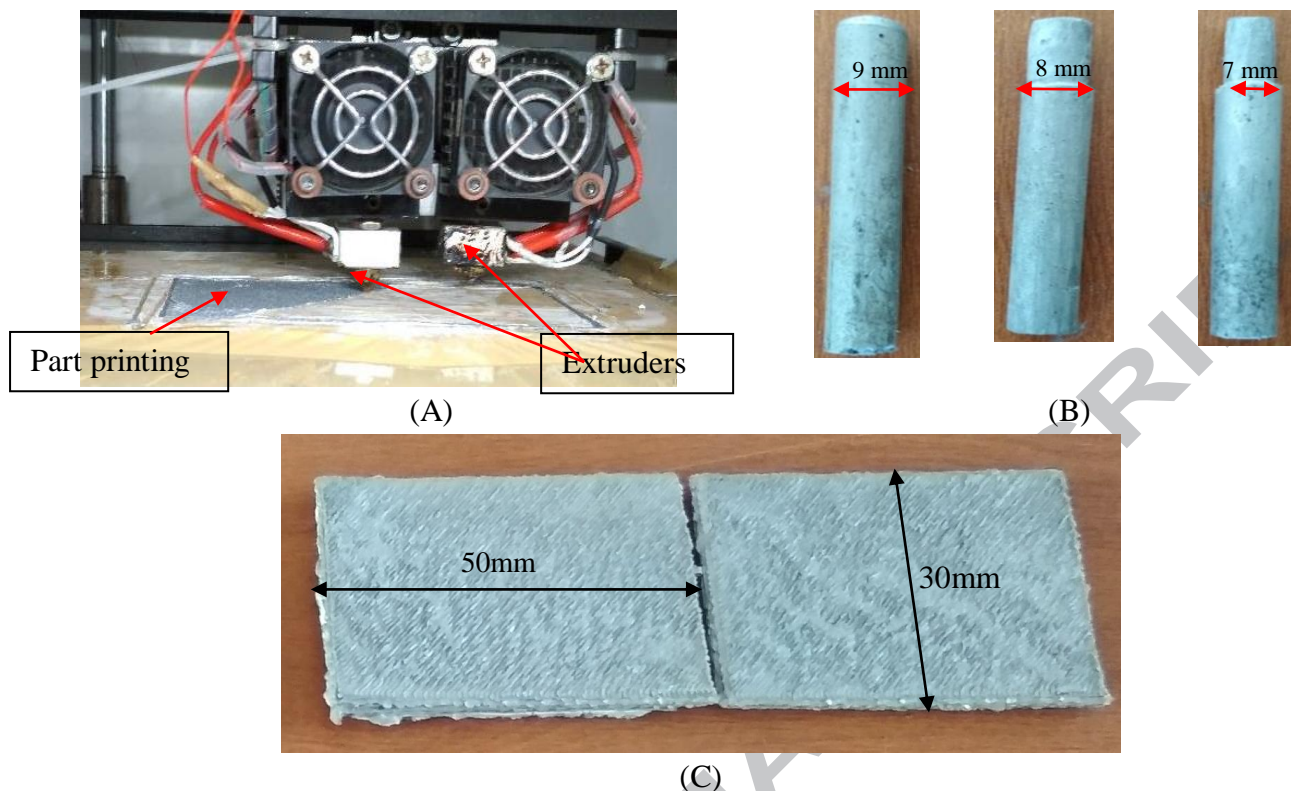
Photographic view of (A) Part fabrication on FDM, (B) Printed Shoulder less pin of PA6-50Al for FSW and (C) Printed sheets of ABS-15Al for joining
